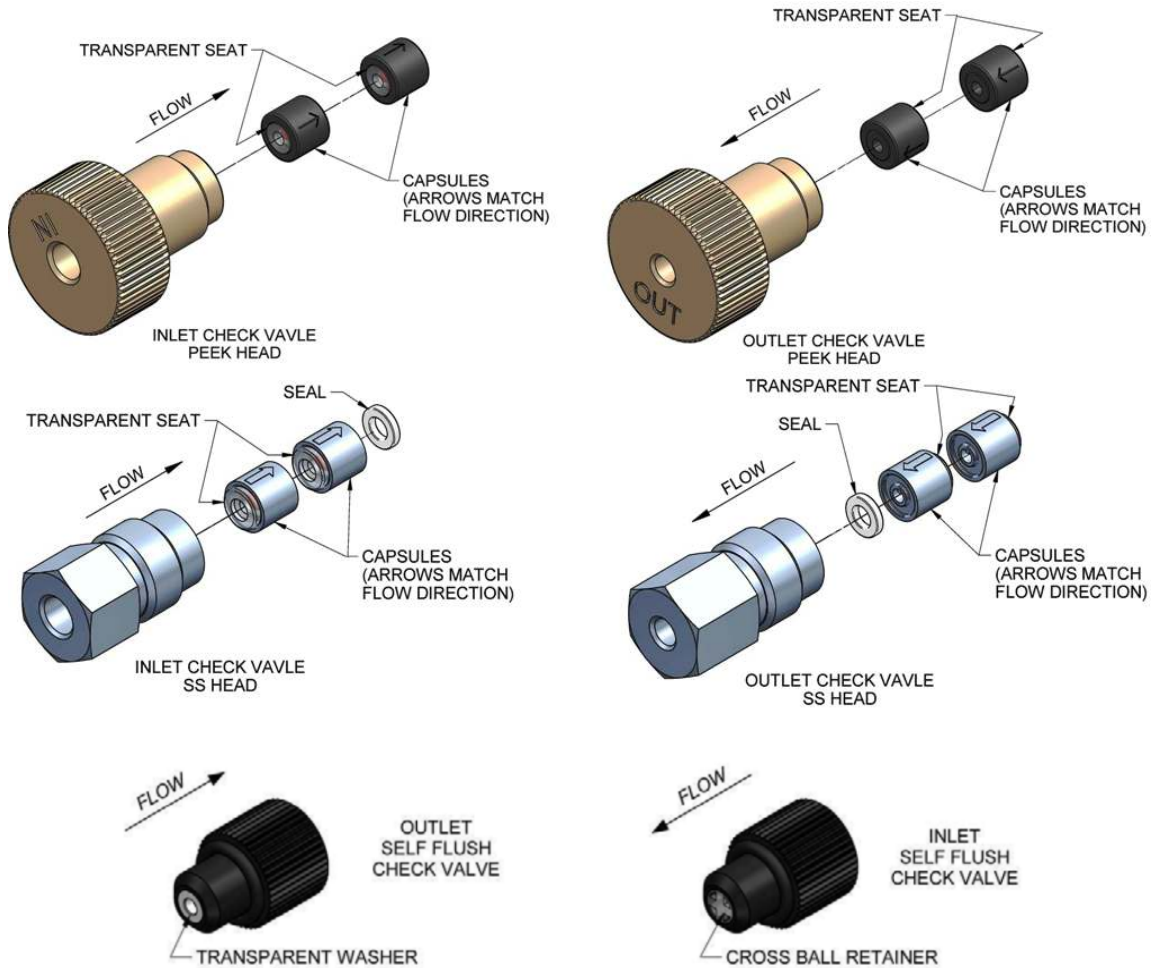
, Check Valve Assemblies for Stainless Steel, PEEK Pumps, Self-Flush Housing
